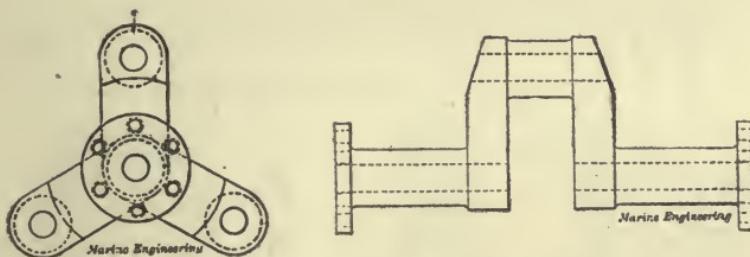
SECTION OF FORGED CRANKSHAFT
